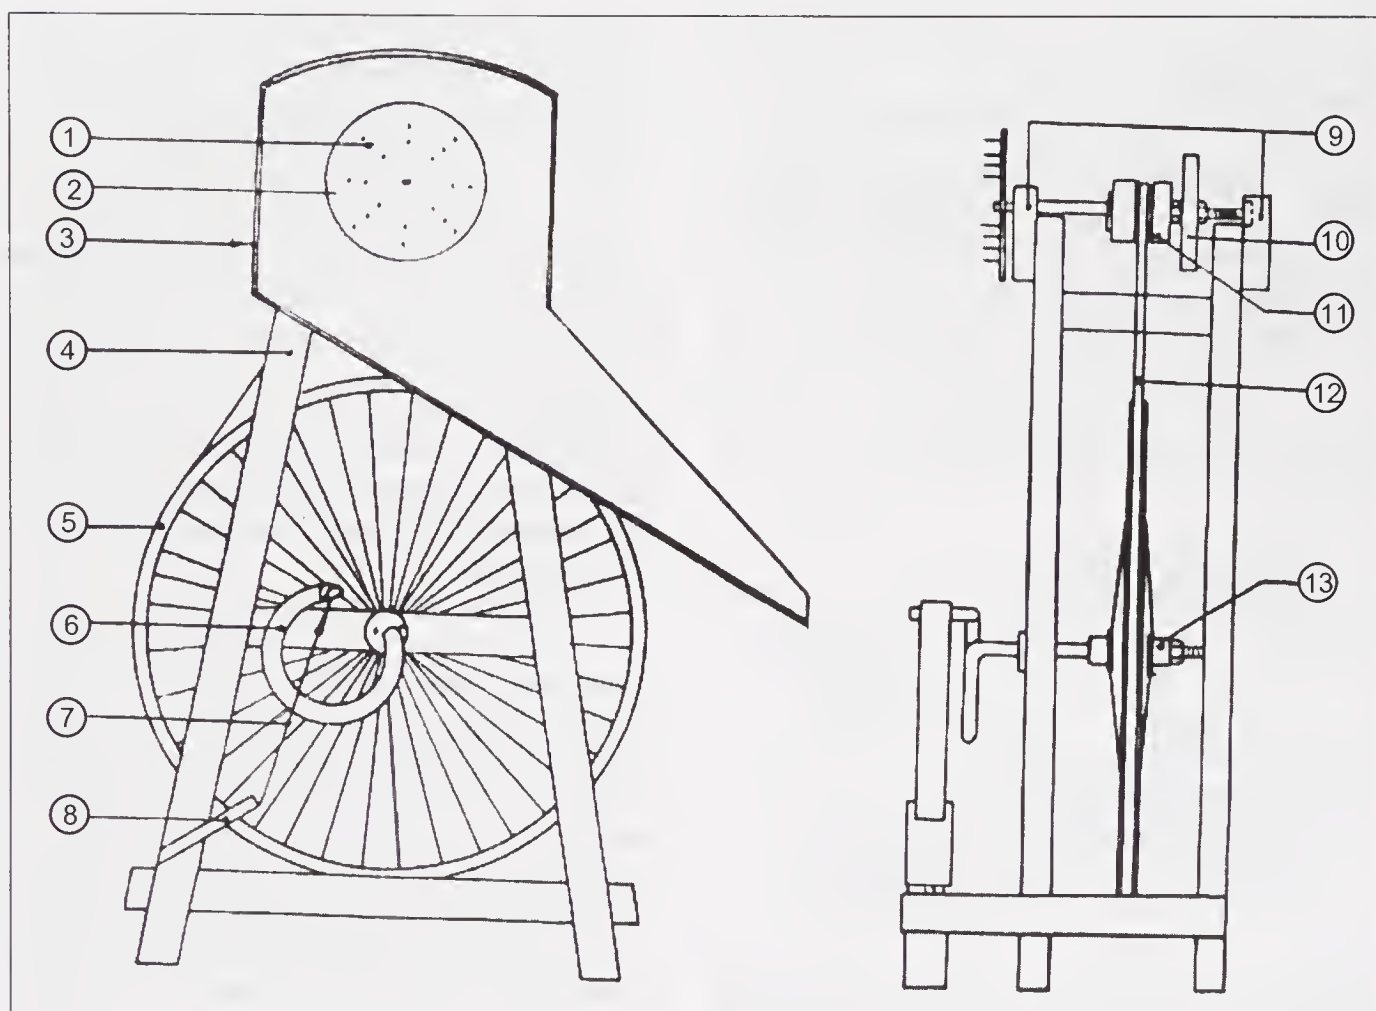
Rotating disc type pedal operated sunflower thresher. 1, Disc spikes; 2, Disc; 3, Seed collector; 4, Frame; 5, cycle wheel; 6, Crank; 7, Lever; 8, Foot pedal; 9, bush bearings; 10, Flywheel; 11, Pulley; 12, Belt and 13, Hub.
